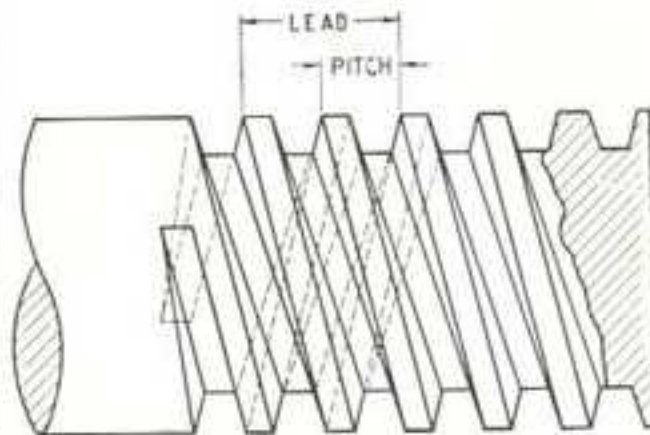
A Multiple Screw Thread Having Two Grooves (Double Thread)
